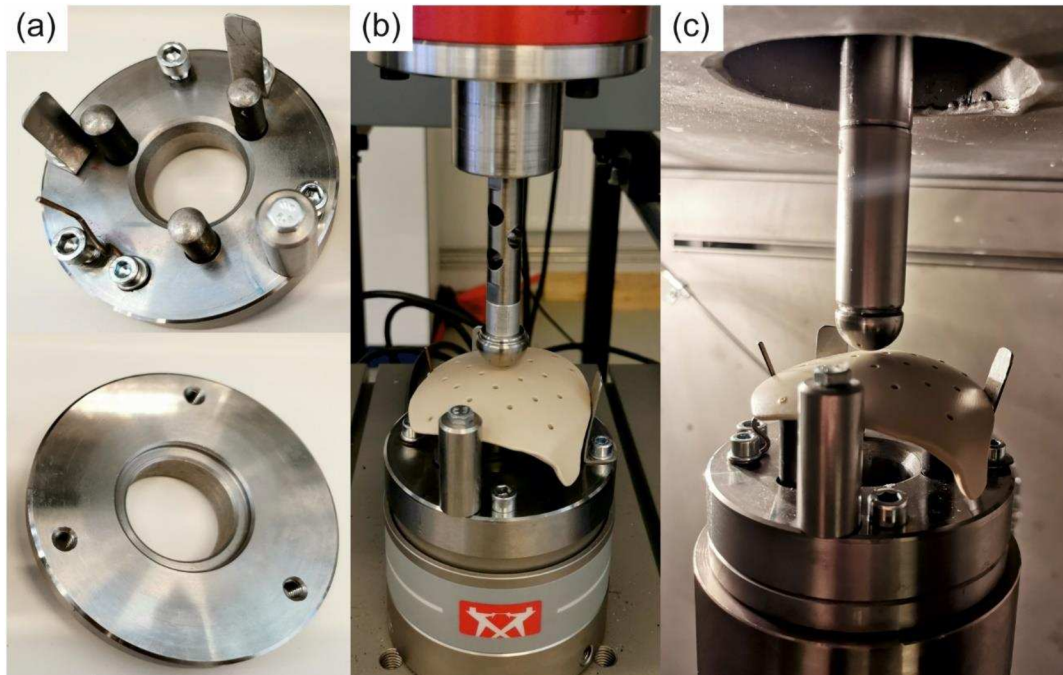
Special fixture with 3 support points and attachments that can be mounted on two different machines (top – cyclic, top+bottom – impact) (a) for performing cyclic (b) and impact tests (c).
